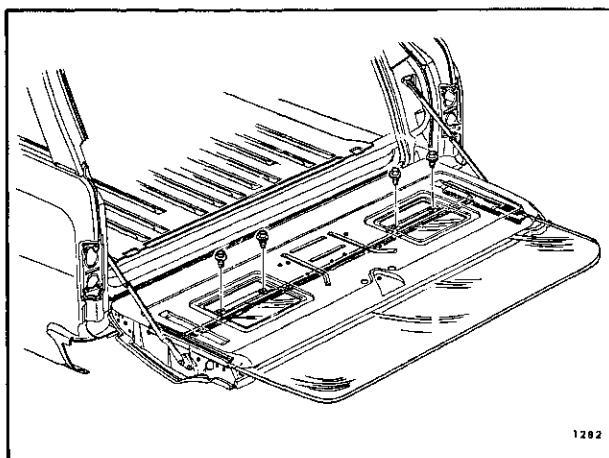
Tail Gate Inner Panel Cam Attachments
